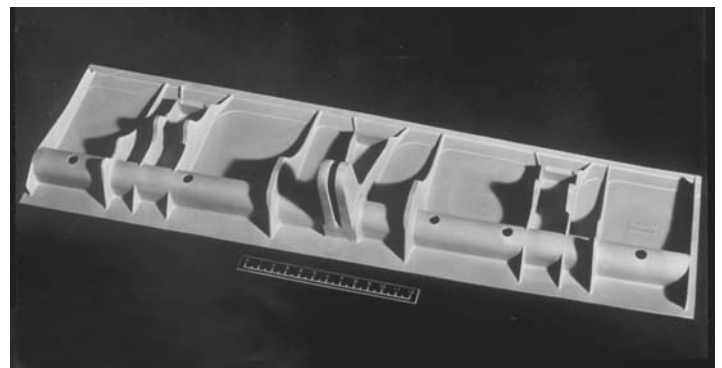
Premium engineered casting helicopter rotor hub
